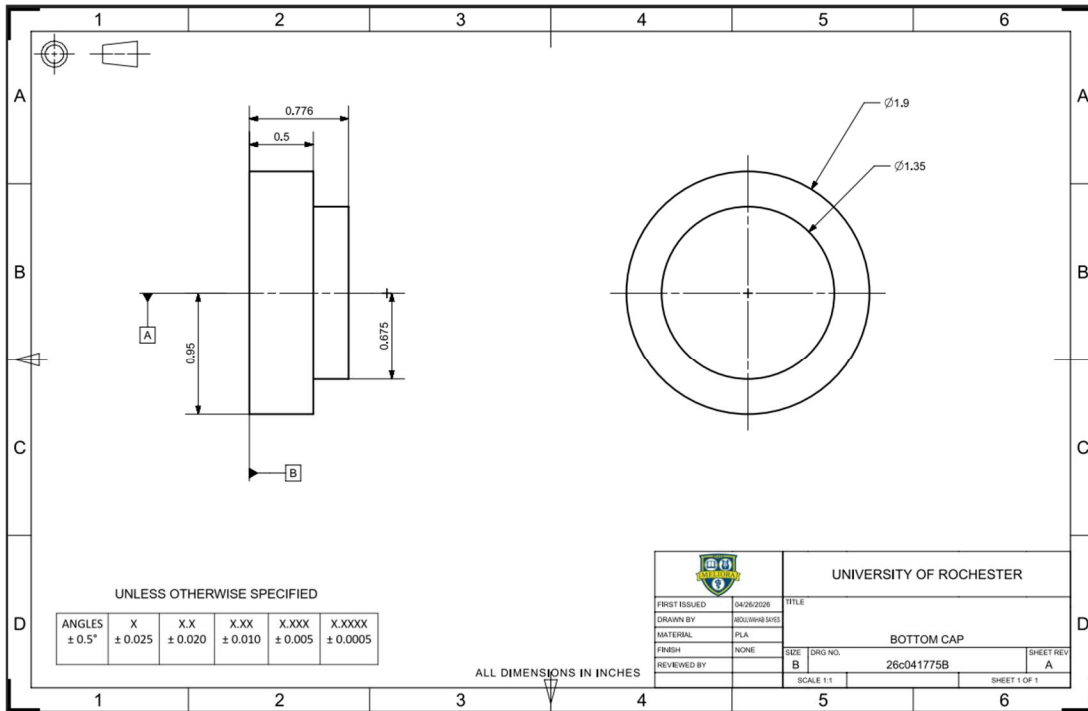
shows the bottom cap used to seal the manifold. During physical testing, RTV silicone was used for waterproofing the 3D printed part.
